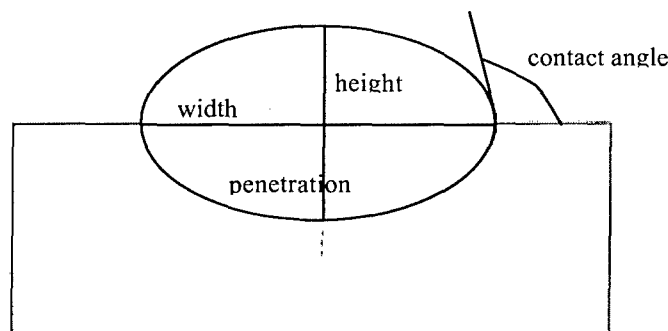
Schematic illustration of macroscopic measurements of bead-on-plate weld deposits.
